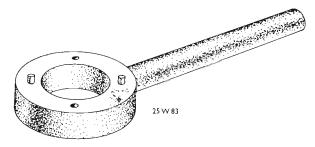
Wheel bearing retainer peg spanner No. 61-3694
